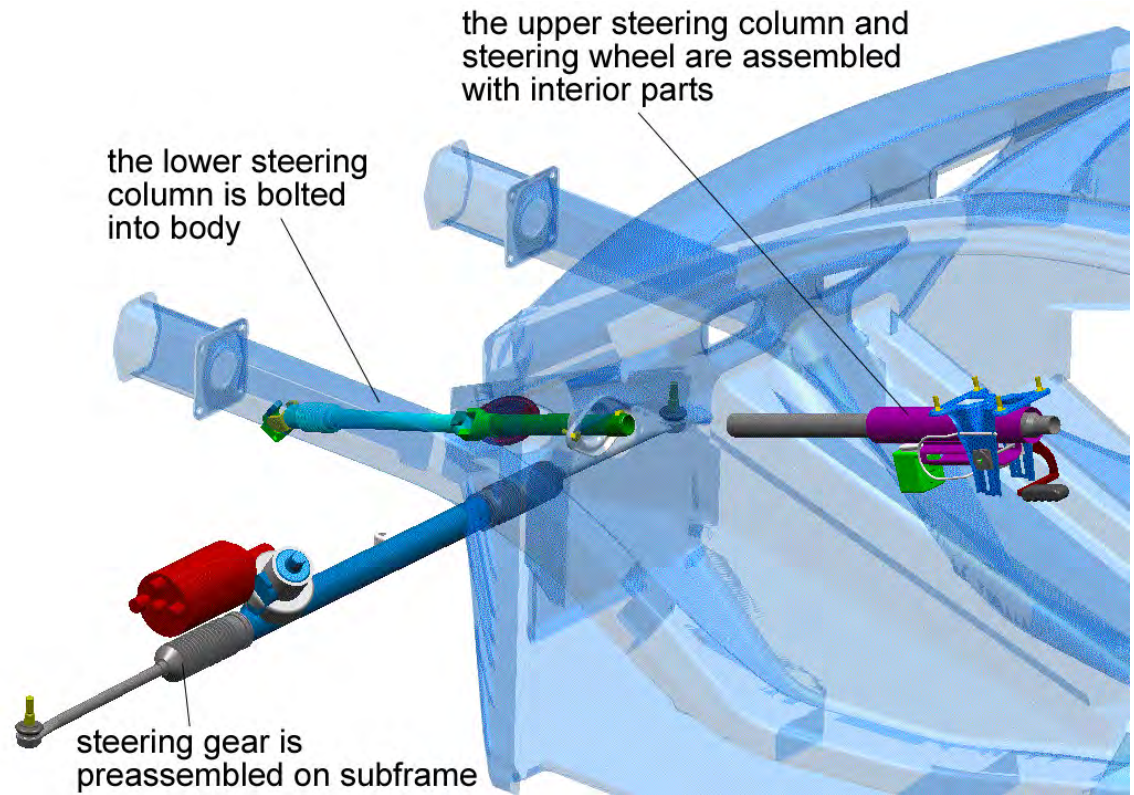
Assembly concept of steering column into vehicle
